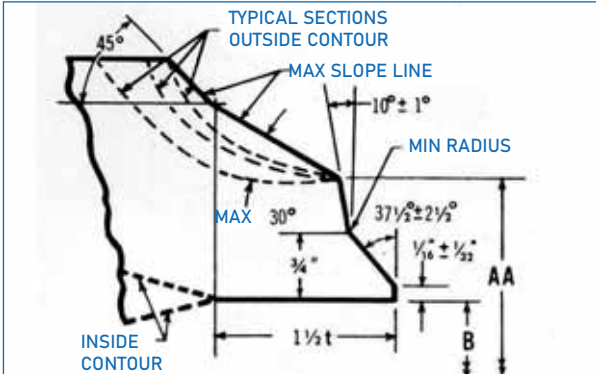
B–Welding End for No Backing Ring or for split Backing Ring. Pipe Wall Thickness “t” Greater Than 7.8 in.
